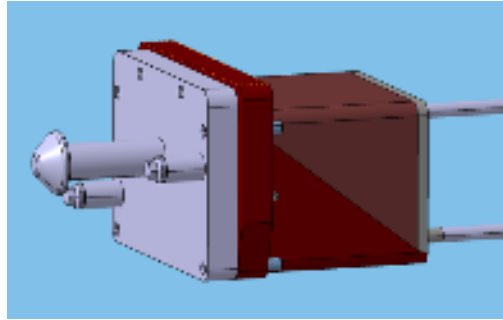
The RH bracket mounted on Mirror 1 – the plasma facing launcher mirror. The plate captivates the mounting bolts of M1.
